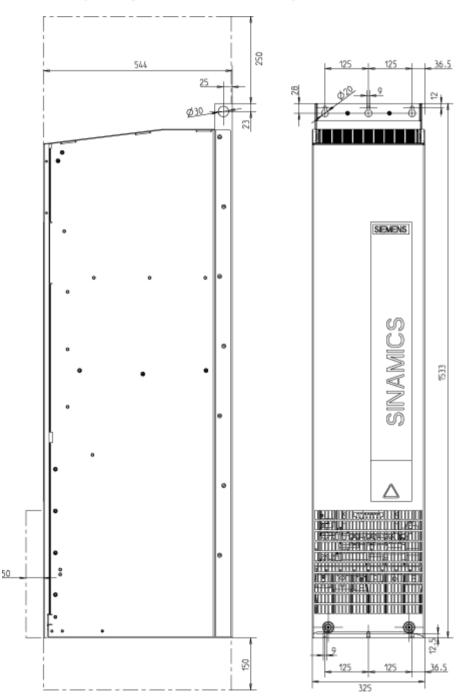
Dimension drawing for Active Interface Module, frame size GI Side view, front view
